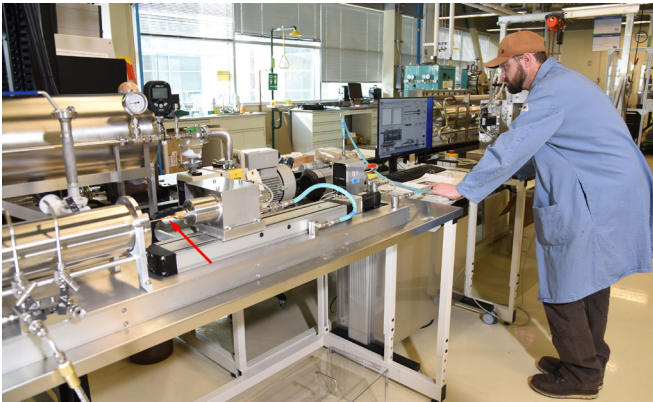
Drilling module starting to drill a 2.5 mm hole 50 mm deep into a fuel pellet stack (in preparation for installing a thermocouple)
